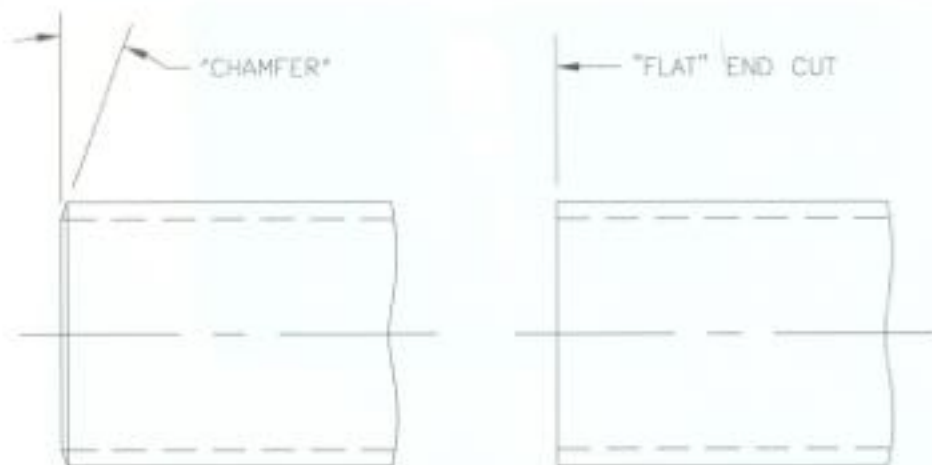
Drawing of tube showing chamfer end compared to a flat end cut
